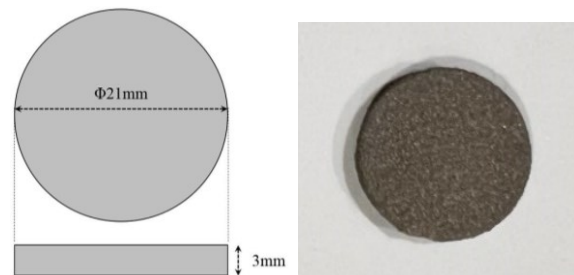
Top and front view and dimensions of the St. St. 304L substrate (left), and a photograph of the coated sample (right)
